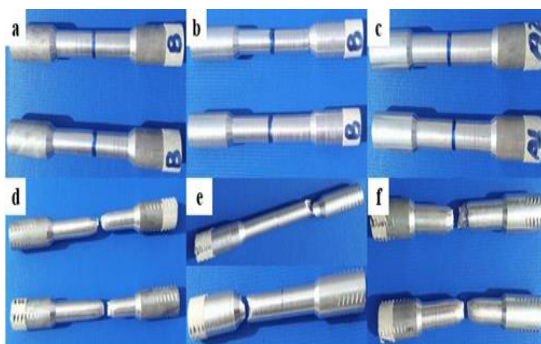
(a) Similar welds 6061-T6, (b) Similar welds 2024-T6, (c) Dissimilar Welds, (d) fractured samples of Similar welds 6061-T6, (e) Fractured samples of 2024-T6, (f) Fractured samples of dissimilar welds.
